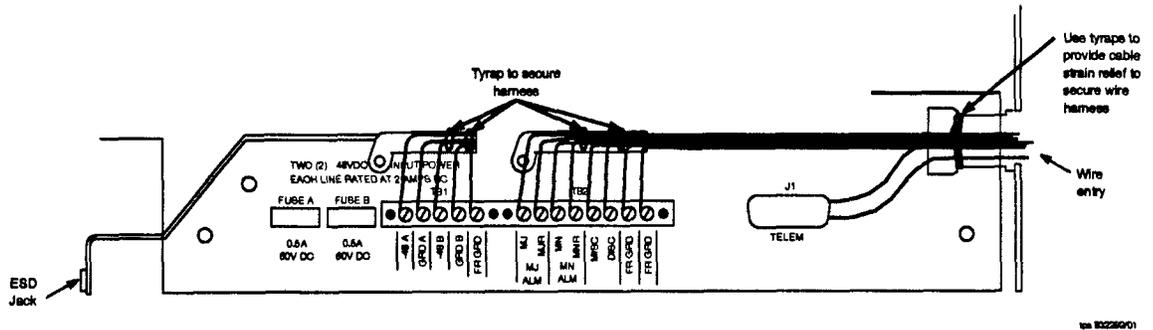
Wall DT Power and Office Alarms Cable Layout
